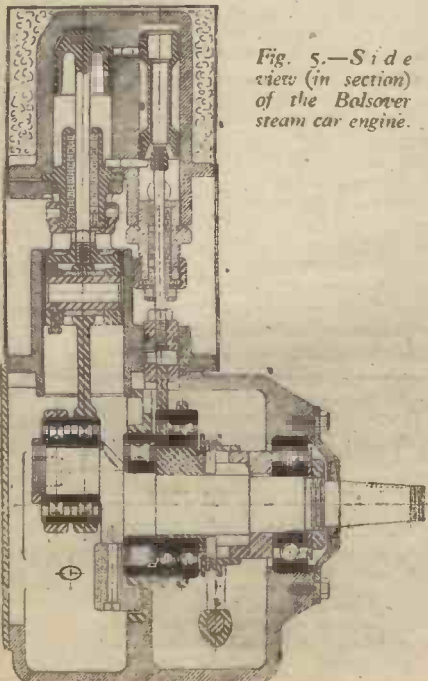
Side view (in section) of the Bolsover steam car engine.
